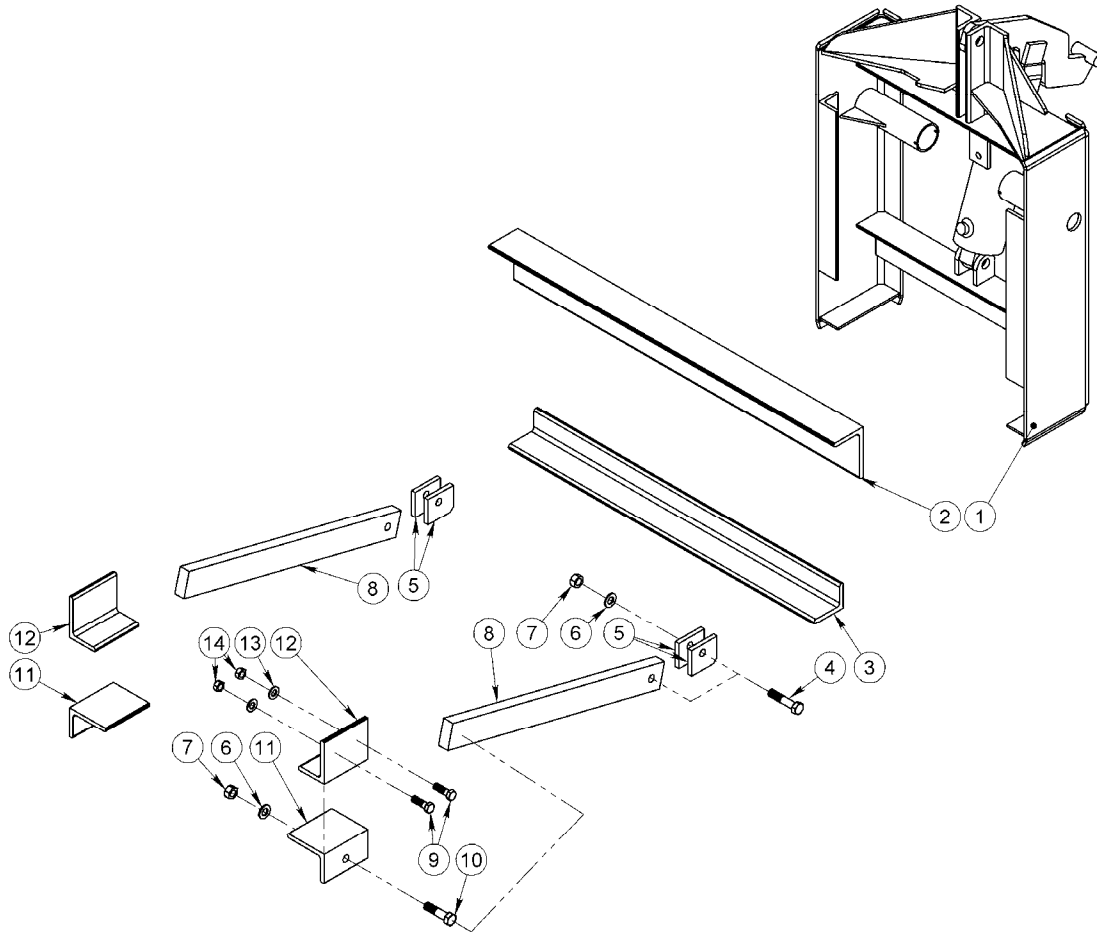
Typical Thrust Arm Attachment, Parts View
